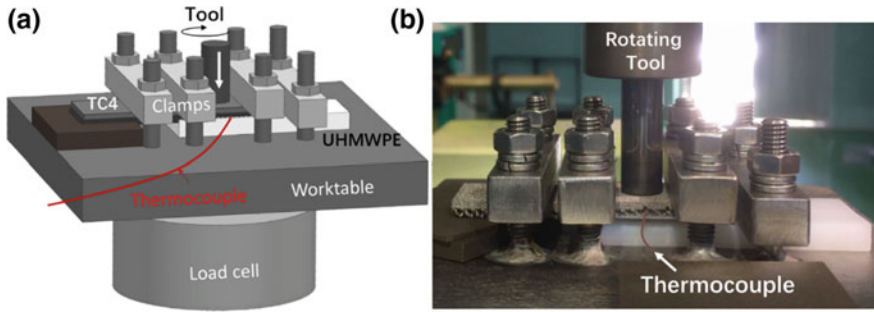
a 3D structure of welding system b picture of welding process
